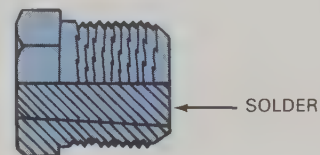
A fusible plug has an opening that is sealed with solder that will melt at a specified temperature (usually 165 °F or 210 °F).
